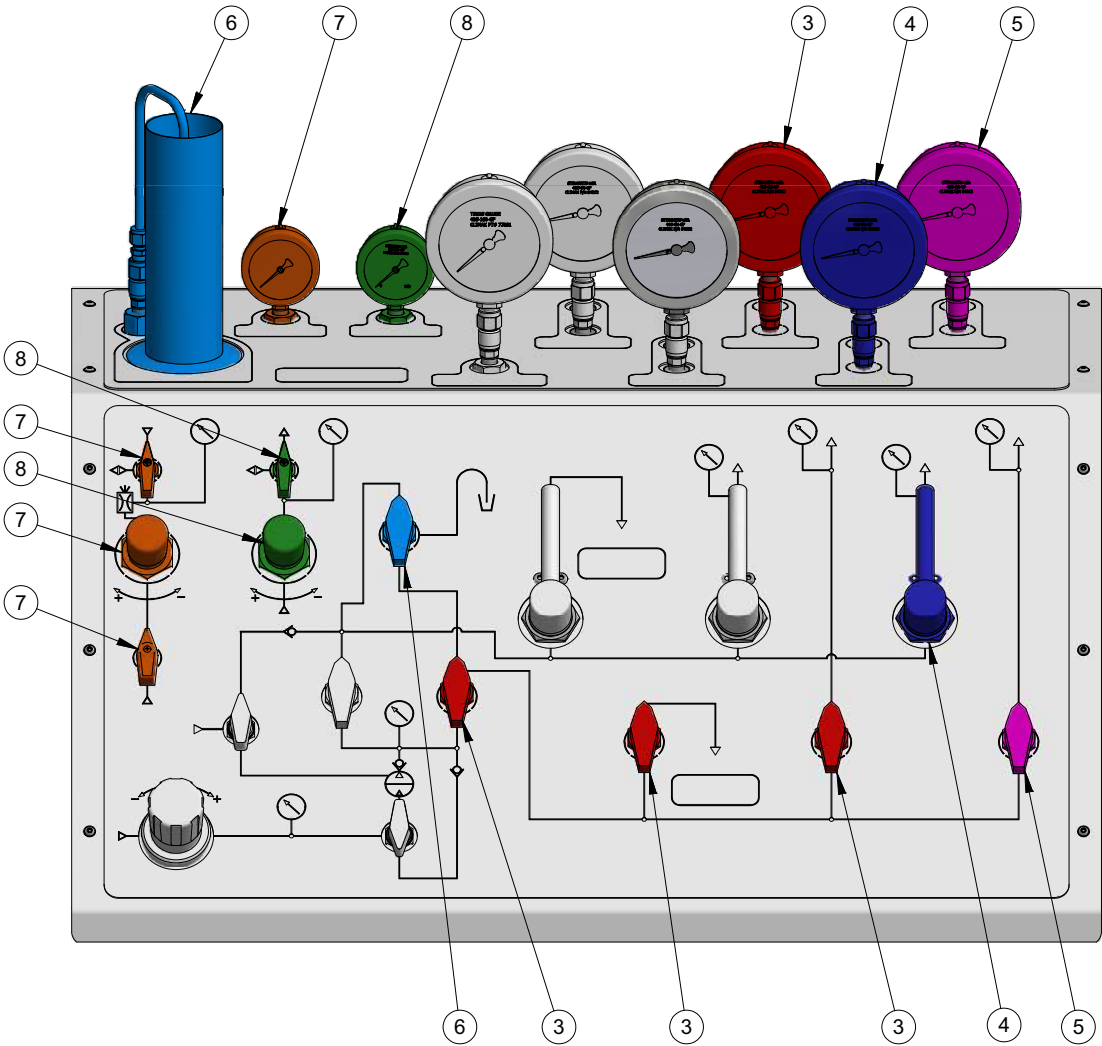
HPC-6K BASE ASSEMBLY BACK VIEW (P/N 87174)
